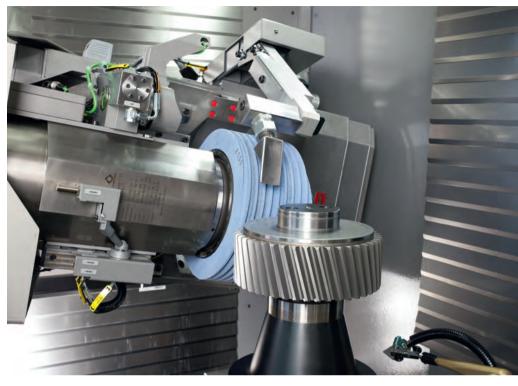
Swivel axis for ergonomic mounting of the grinding wheel and internal grinding arms
